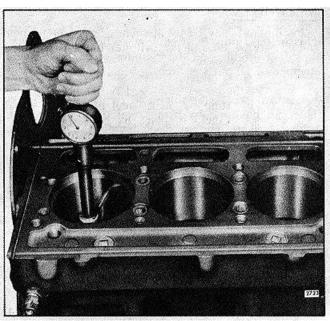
Checking Bore of Cylinder Block with Tool J 5347O01
